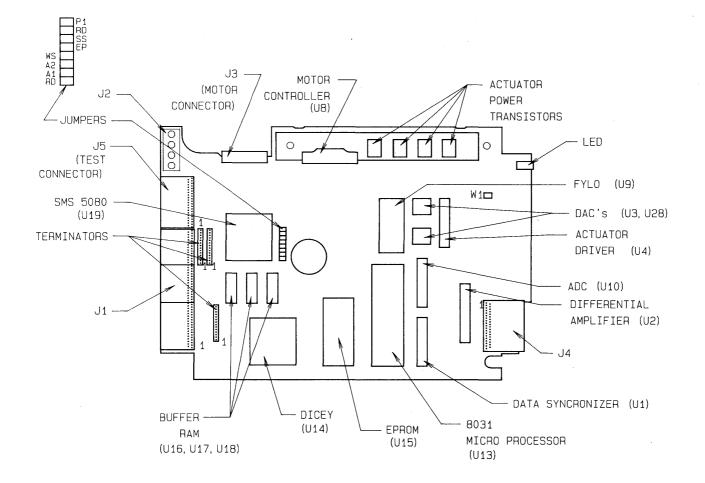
General PCB Layout; Plug, Terminator and Connector Locations
